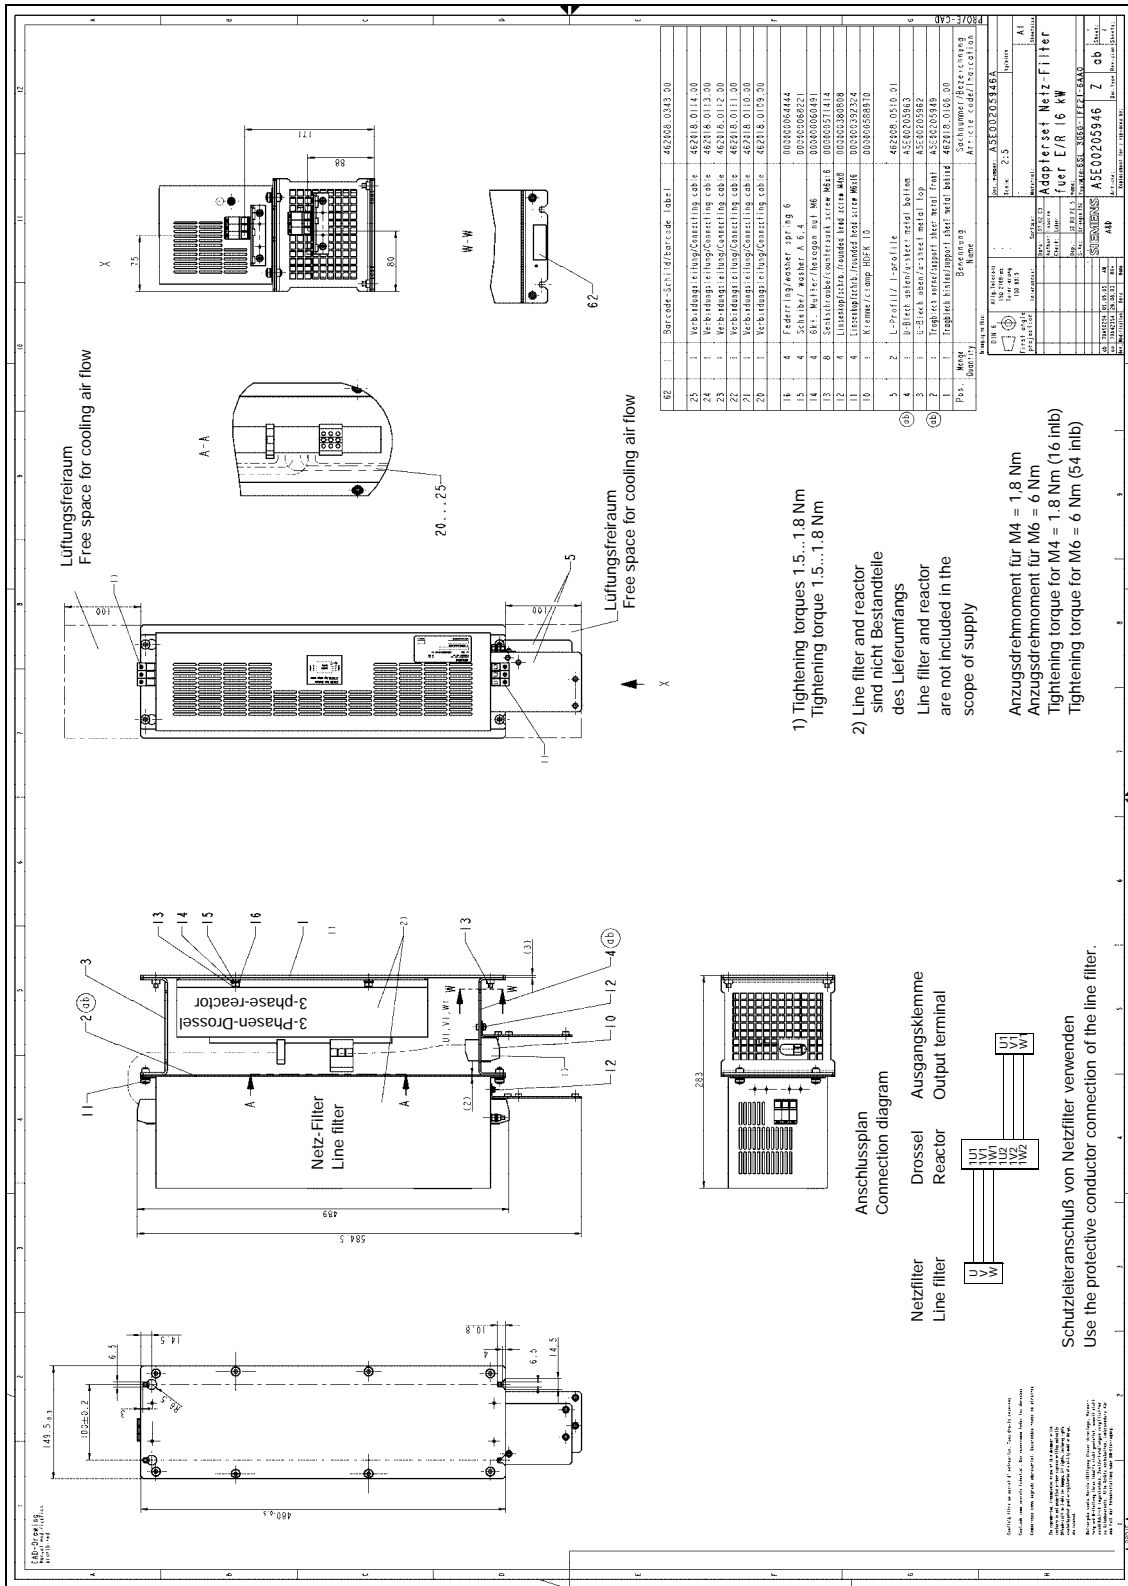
Adapter set, line filter for I/R module 16 kW, 6SL3060-1FE21-6AAx; dimension drawing
